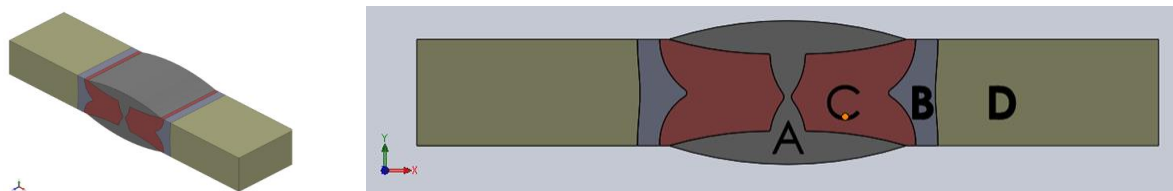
Inhomogeneous of double V welded butt joint model.
